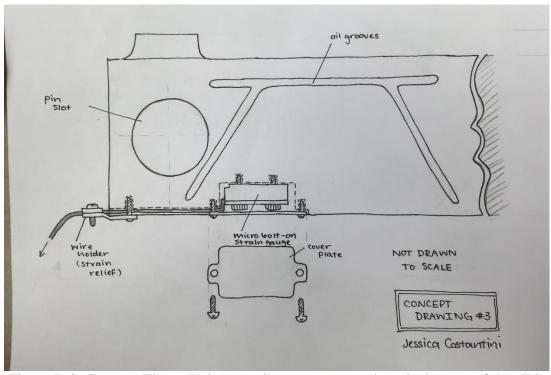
Concept Three: Bolt on strain gauge mounted on the bottom of the slide
